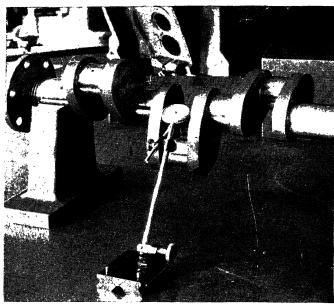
Use of surface gage. Dial gage mounted on a surface gage. This setup can be used to determine whether the crankshaft is straight and the bearings are true. (Brown and Sharpe.)
